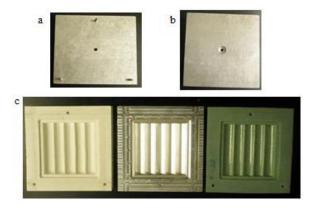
(a,b) Top half of mold; (c) fabricated molds: VHMW, Al, 3D printed
